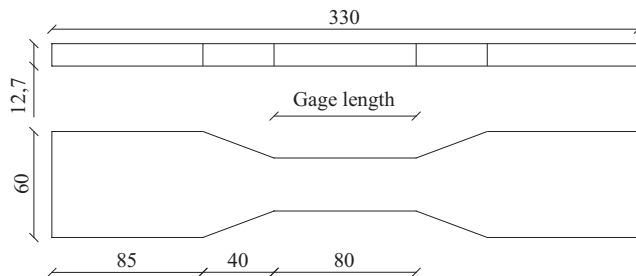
Dimensions of dogbone specimens for uniaxial tension test (unit: mm).
